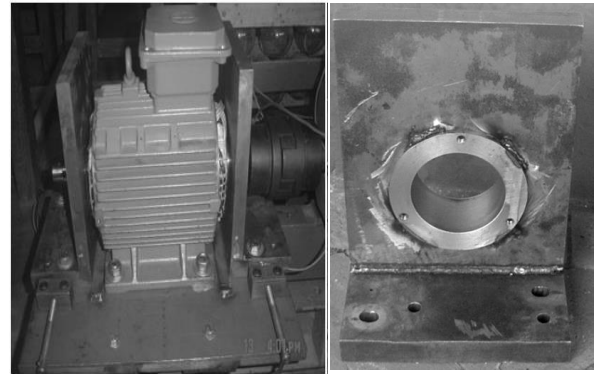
Modified machine and L shaped bracket to vary static eccentricity.
